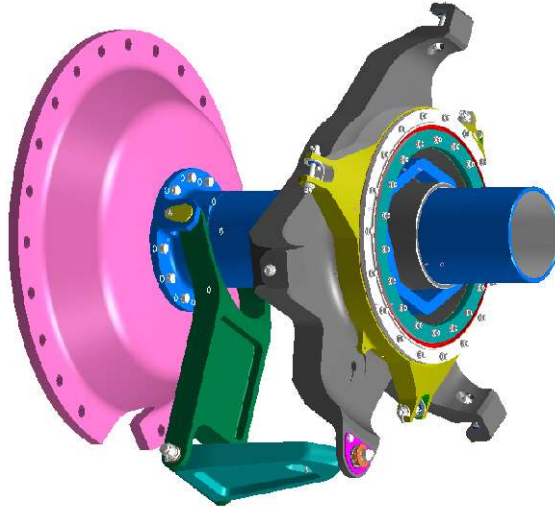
Swashplate assembly and anti-drive link on support tube (Ref. 9, Section 1.3).
